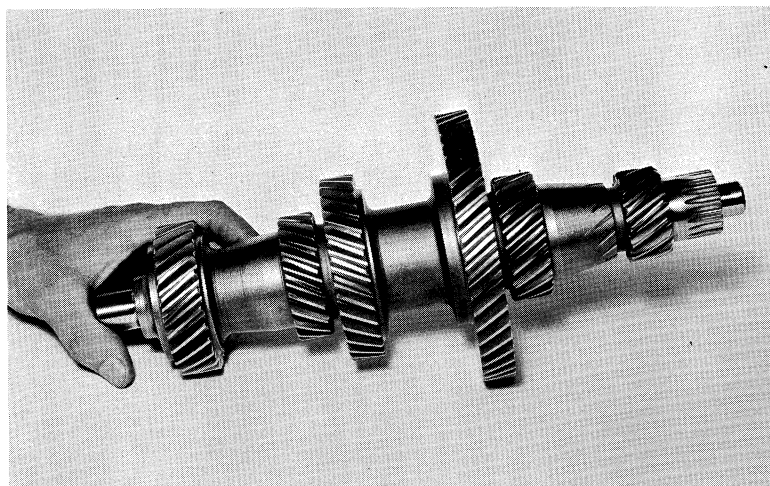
This 13¾-in. long cluster gear for a five-speed tractor transmission challenges the ingenuity of any gear manufacturer. It has six gears and a spline that must run concentric within 0.003-in. true indicator reading. As manufactured in prototype quantities, all tooth finishing operations were completed before heat treatment.
